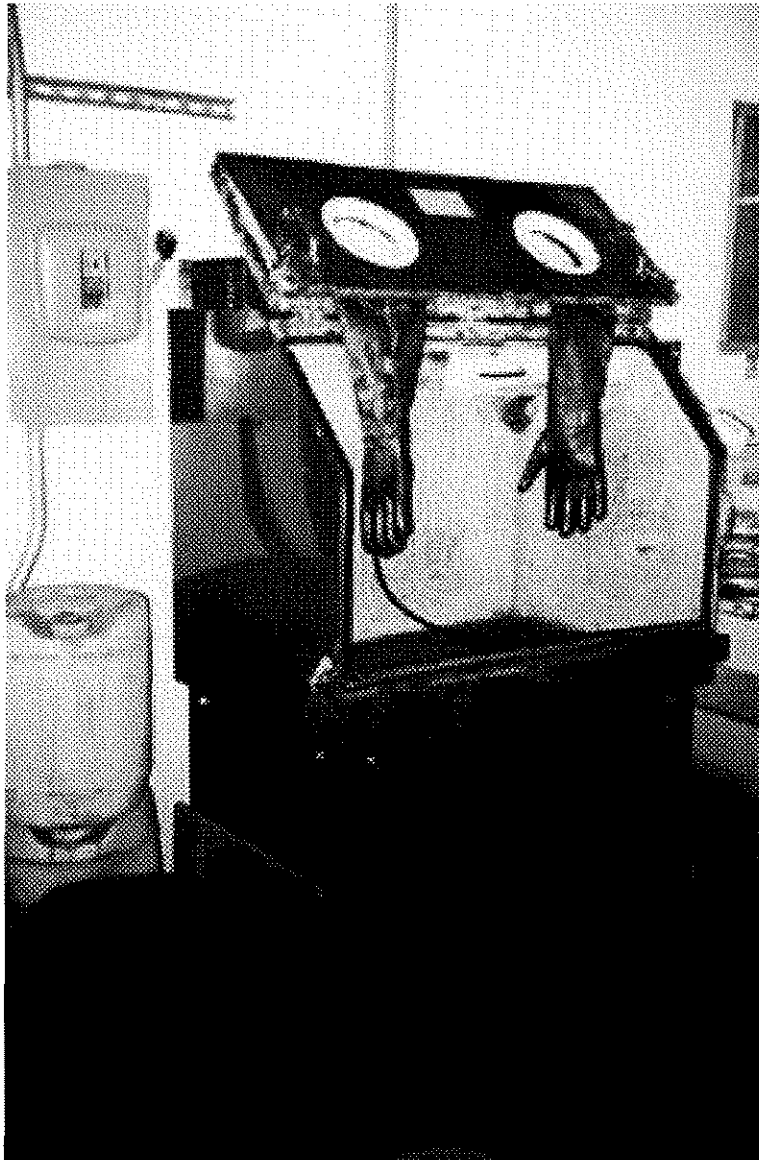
Spray Cabinet at Fortner Engineering
